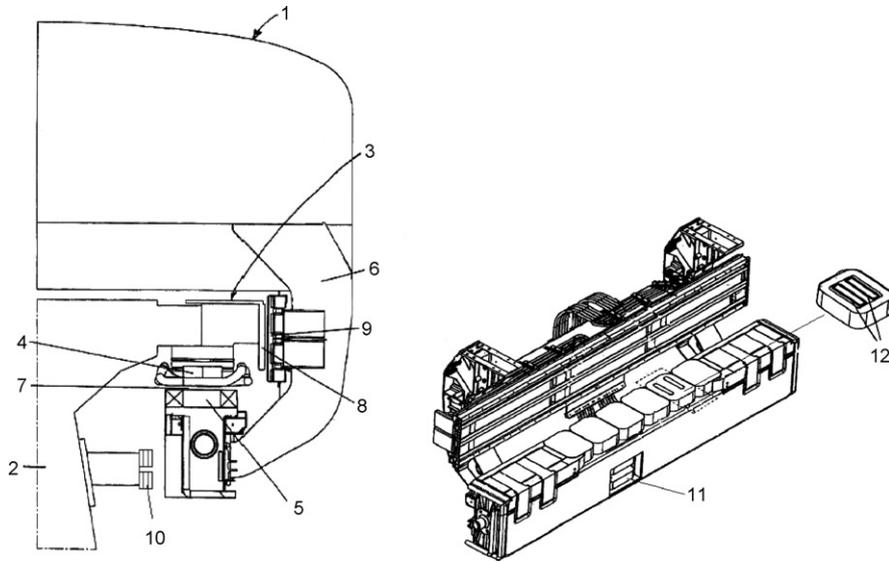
Schematic drawing of the maglev system (copy from PCT/DE2005/000406). (1) Vehicle body; (2) guideway; (3) sliding surface; (4) longstator; (5) suspension magnet; (6) suspension frame; (7) longstator winding cable; (8) guiding surface; (9) guiding magnet; (10) power rail; (11) current collector; (12) power generating coil.
